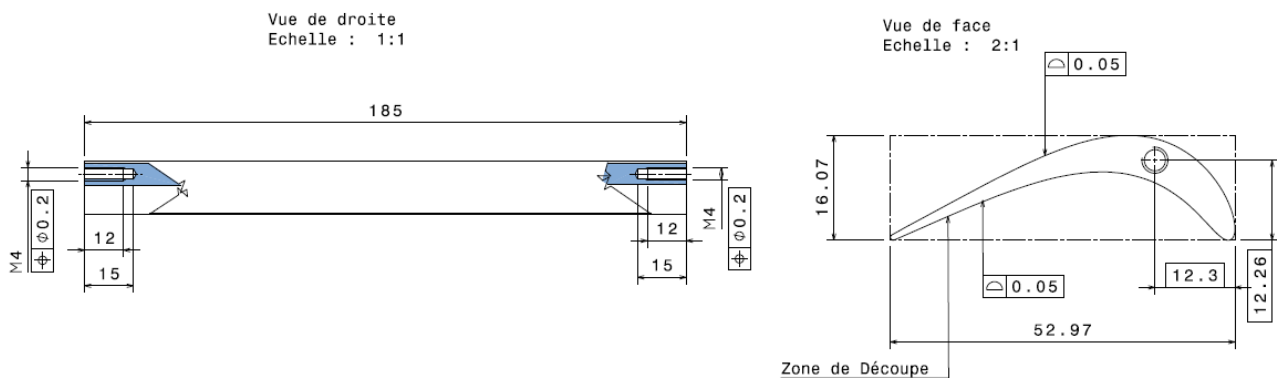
B-SMOOTH profile shape tolerances (snapshot of technical drawing shared with the manufacturer)
